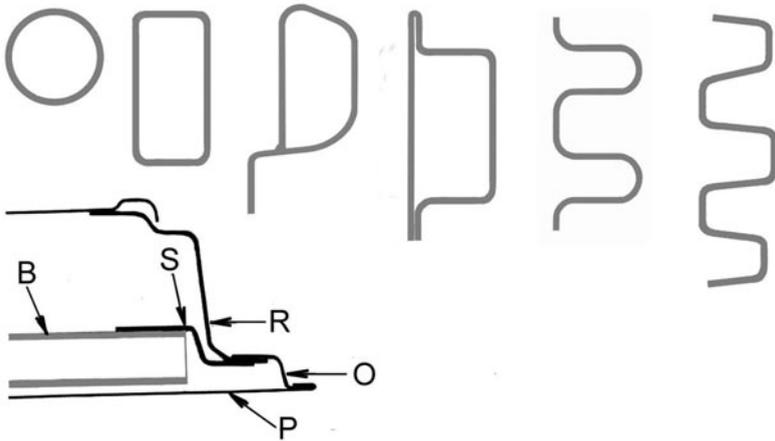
Examples of boxed and open sections used in door safety beams; detail of link between a tubular beam and door pillar reinforcement. B: tubular beam; S: bracket; O: door inner panel; R: door pillar reinforcement; P: outer panel.
